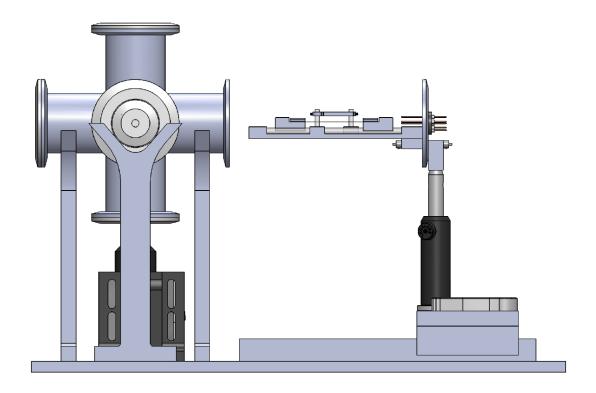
View of internal subassembly completely removed from chamber by sliding on rail
